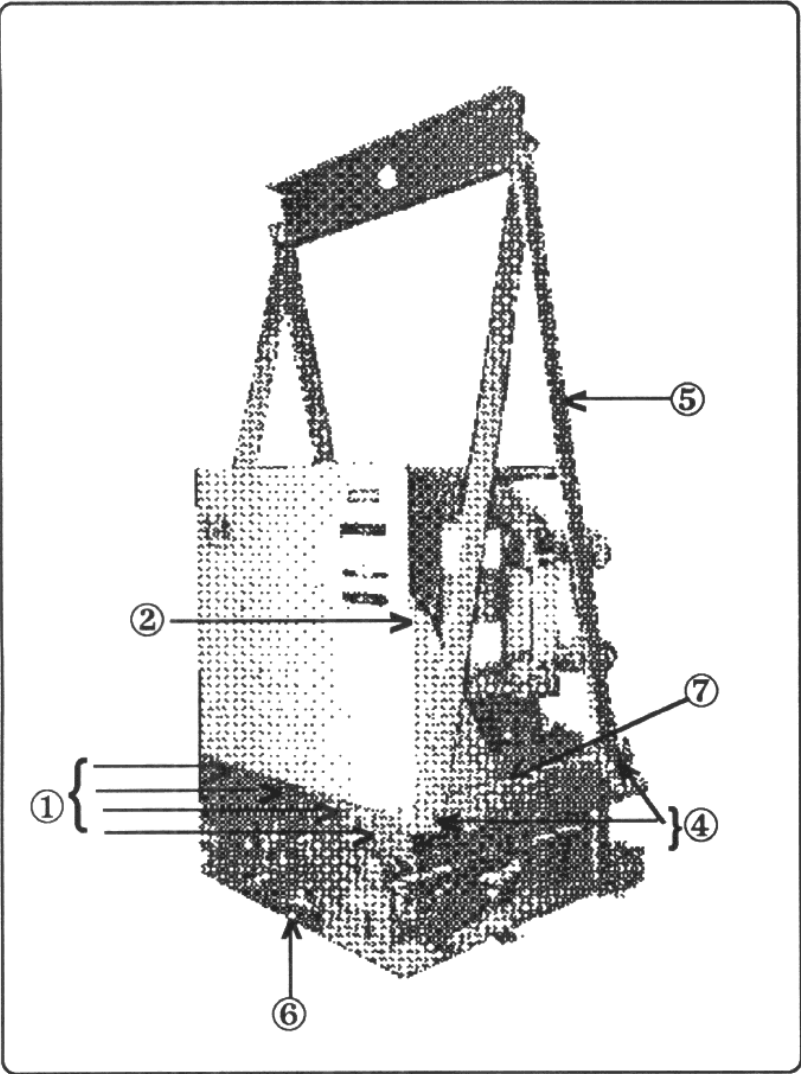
Circuit Breaker Assembly with Lifting Yoke Installed
